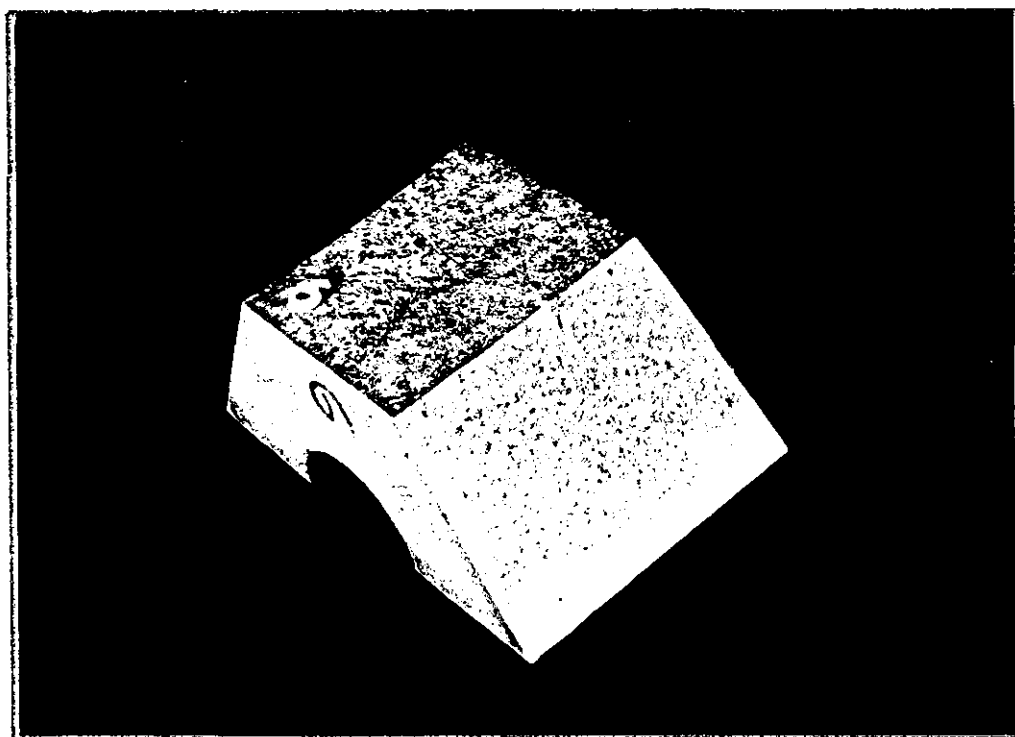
View of the as-cast back surface of the casting above showing the inter-dendritic shrinkage defect.
